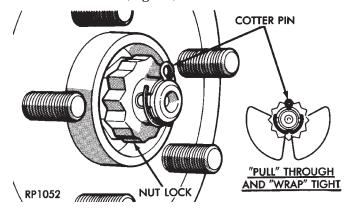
Installing Spring Washer, Nut Lock And Cotter Pin
